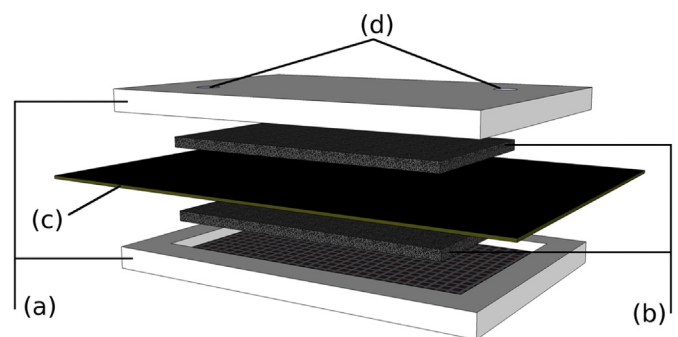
Exploded view of the construction of MFCs with stainless steel flowfield plates, fabricated by LAM. (a) Flowfield plates with flowfield (either grooves or enclosed channels), and basin that accommodates the GDL. (b) GDL. (c) MEA. (d) Gas inlet holes.
